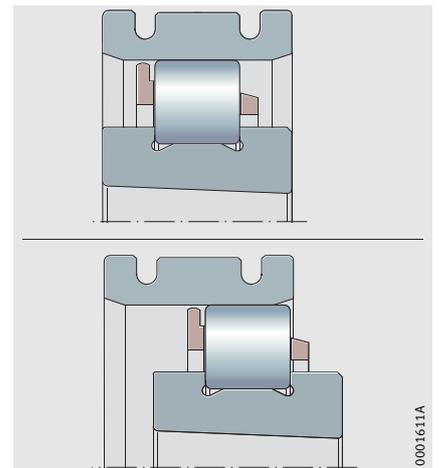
· Cylindrical roller bearing – sliding function in the non-locating bearing
